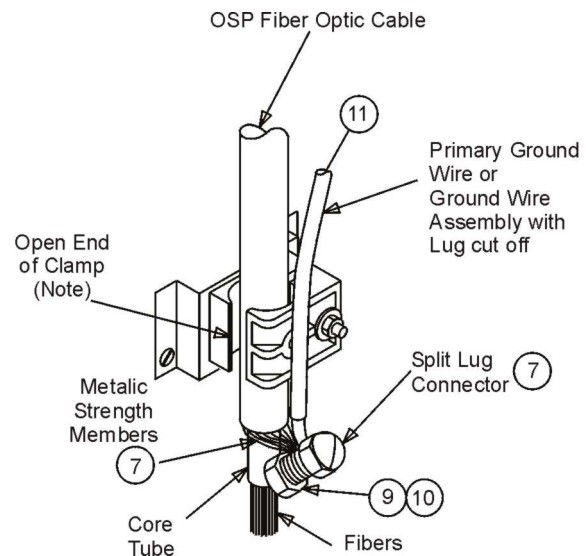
12A1 Cable Clamp Installation For Crossply Type Cable
